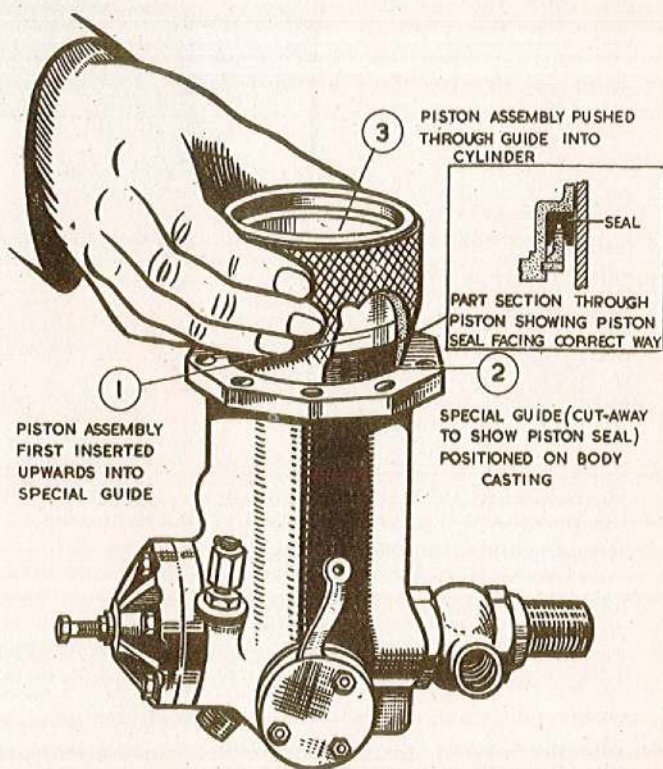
Use of protective guide for insertion of accumulator piston in main cylinder casting
